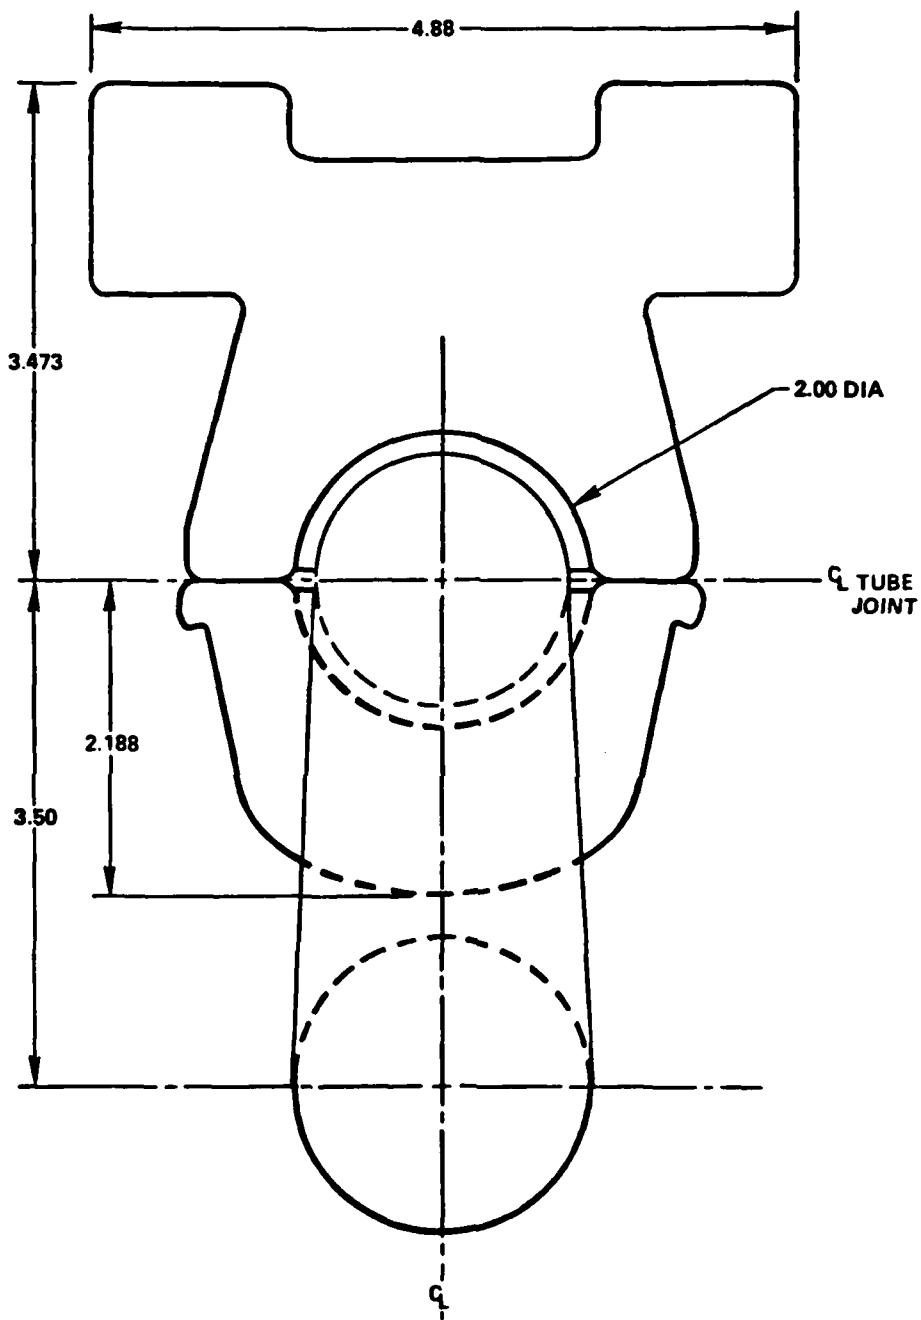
End Elevation of Tube Clamp in Position Prior to Connecting Weld Head
